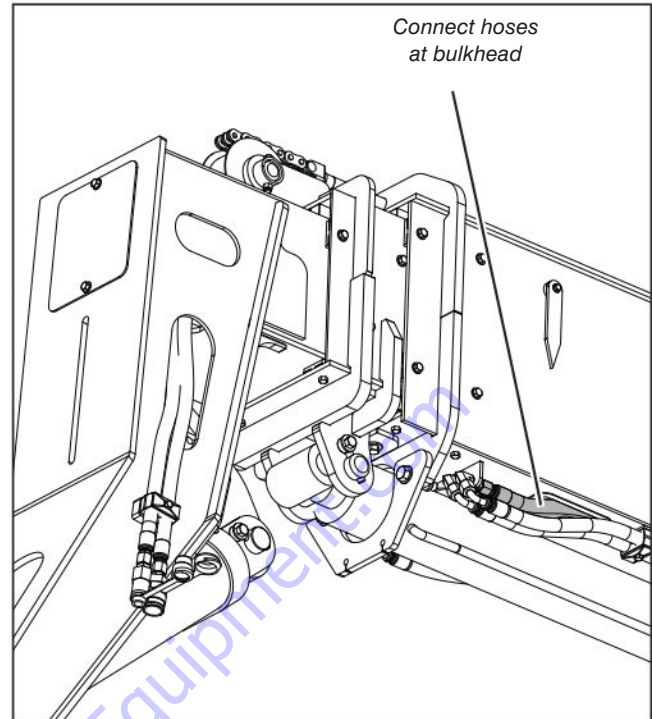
Auxilliary Hydraulics Hoses Connection at Bulkhead
